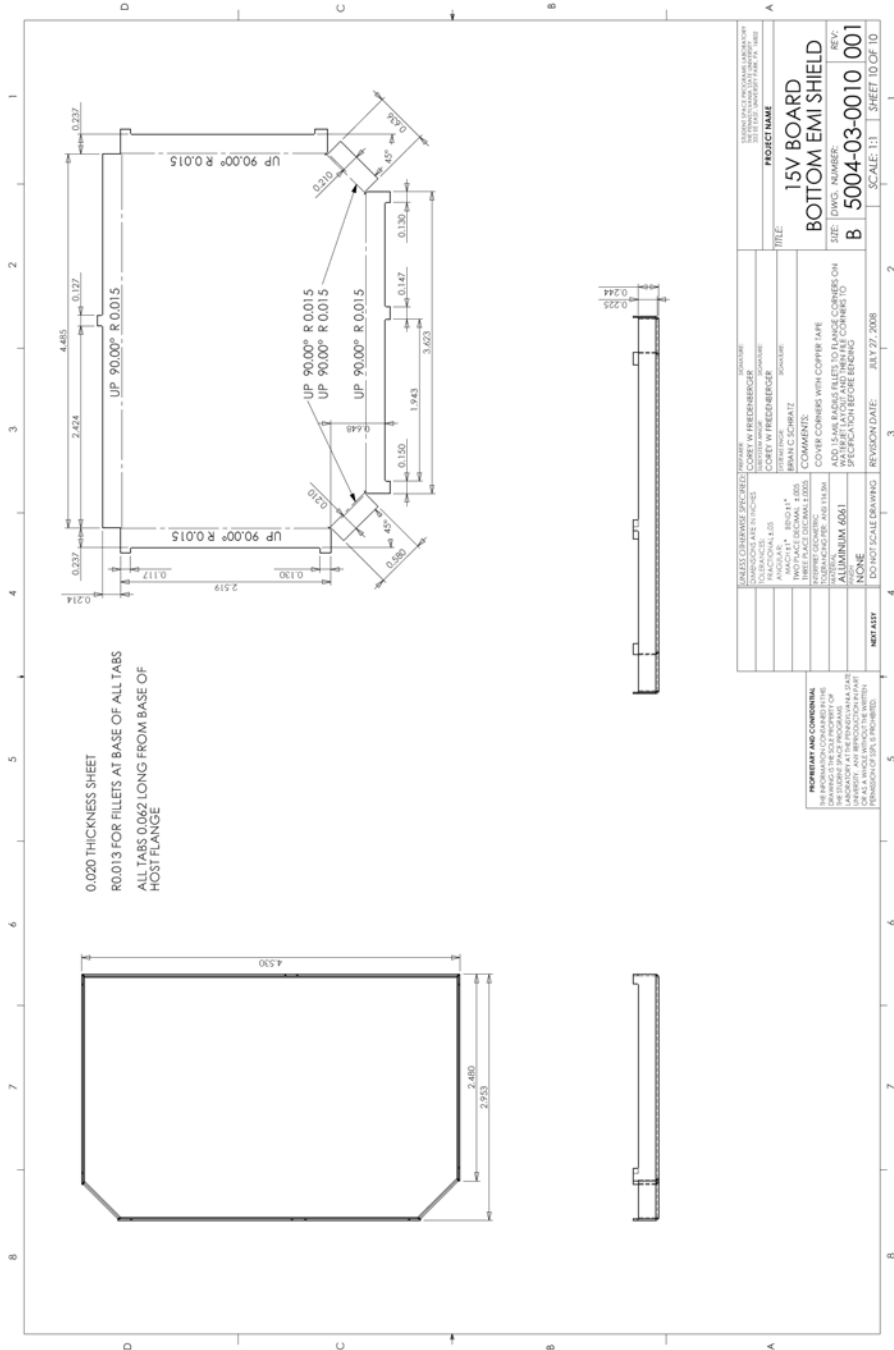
Mechanical Drawing: 15-V Board Bottom EMI Shield
